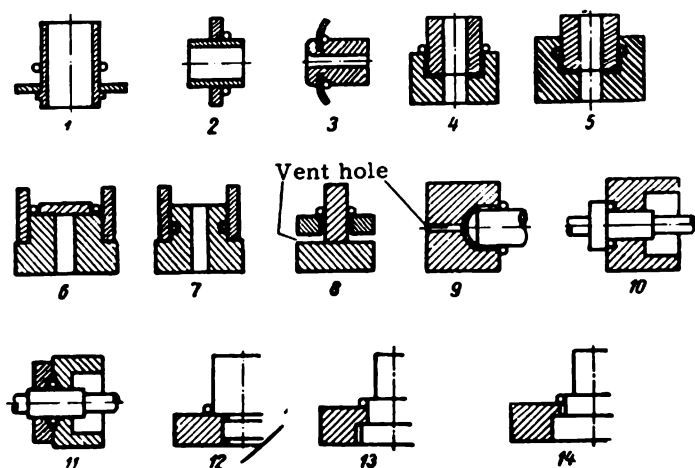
Placing of wire ring-solders before soldering; correct: 1-11 and 14; incorrect: 12 and 13.
